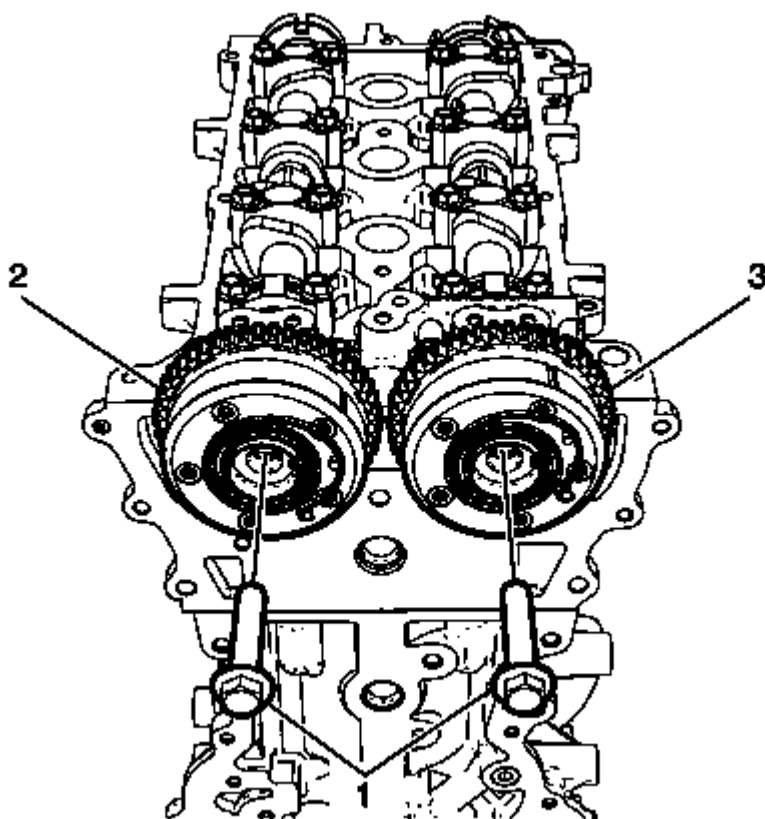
Intake And Exhaust Camshaft Sprocket Bolts
